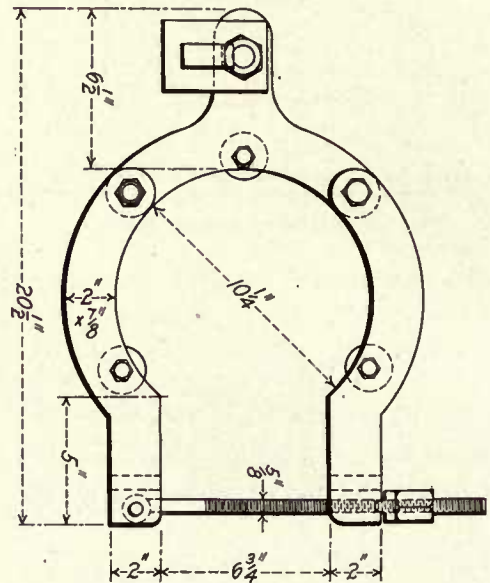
Burnishing Tool for Driving Wheel Journals.
